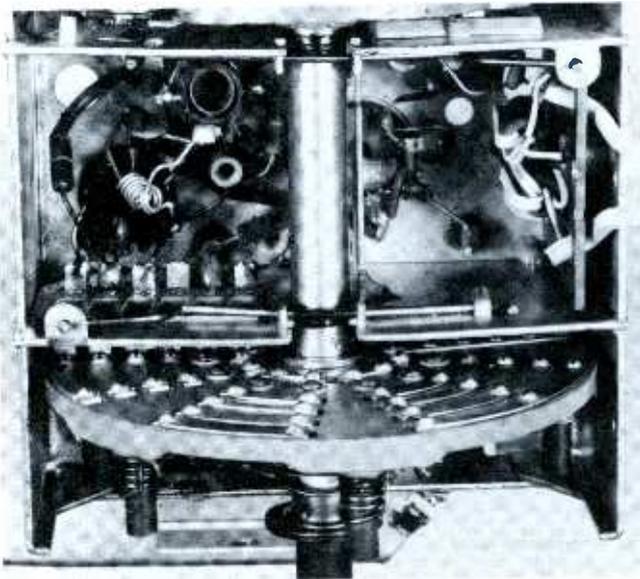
After the epoxy has been applied but before it sets, the disc assembly should be returned to the tuner. The discs should be rotated individually until the outer contacts rest at dead center on the fixed contacts.
